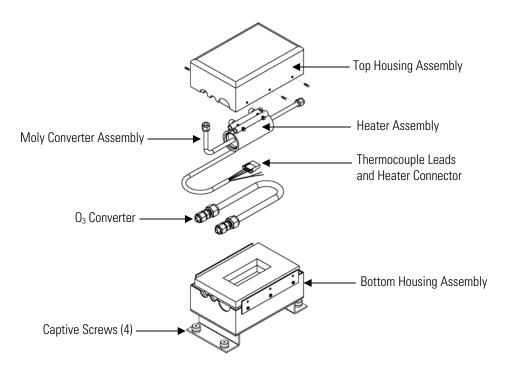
NO₂-to-NO Molybdenum Converter Assembly
